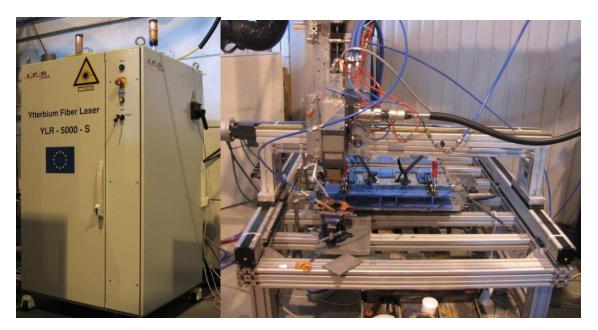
IPG 5 kW fiber laser and the work station for the chamber test welds.
